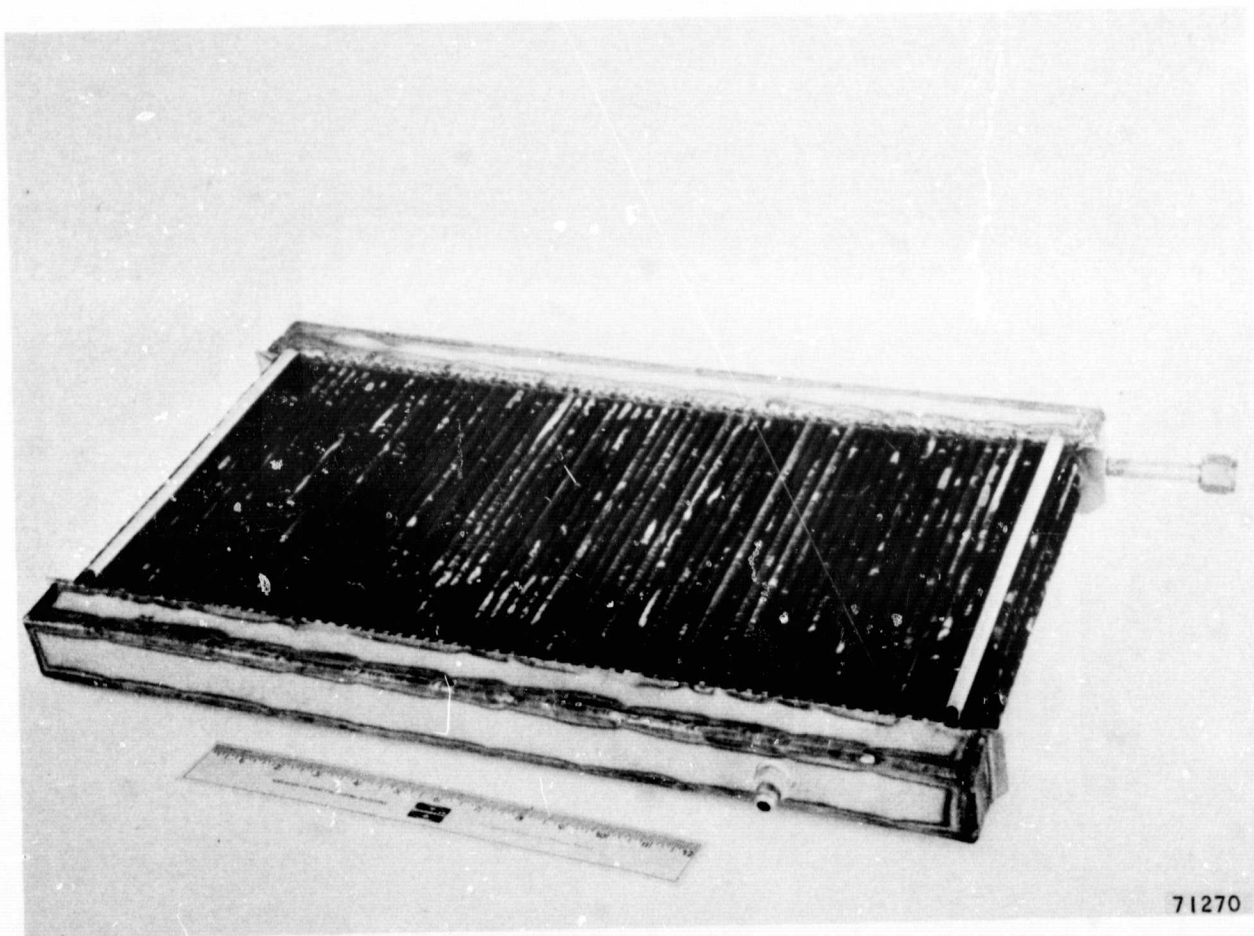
378 Finned Tube Test Specimen with Pans Attached
